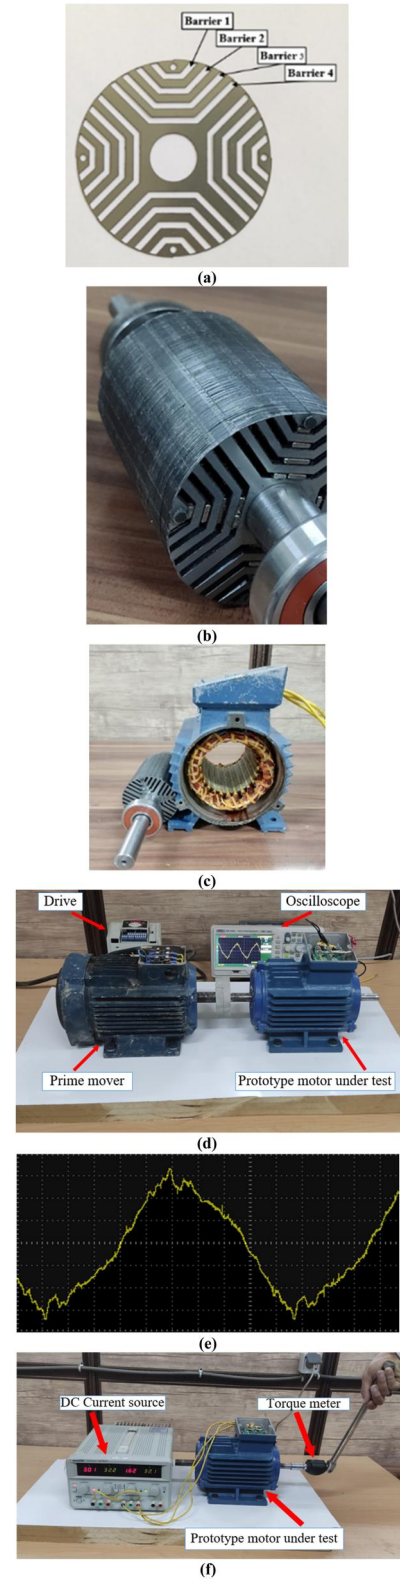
Prototyped machine, (a) rotor sheet, (b) rotor assembly, (c) rotor and stator assembly, (d) test rig under generating mode, (e) measured phase back EMF, and (f) test rig under motoring mode.
